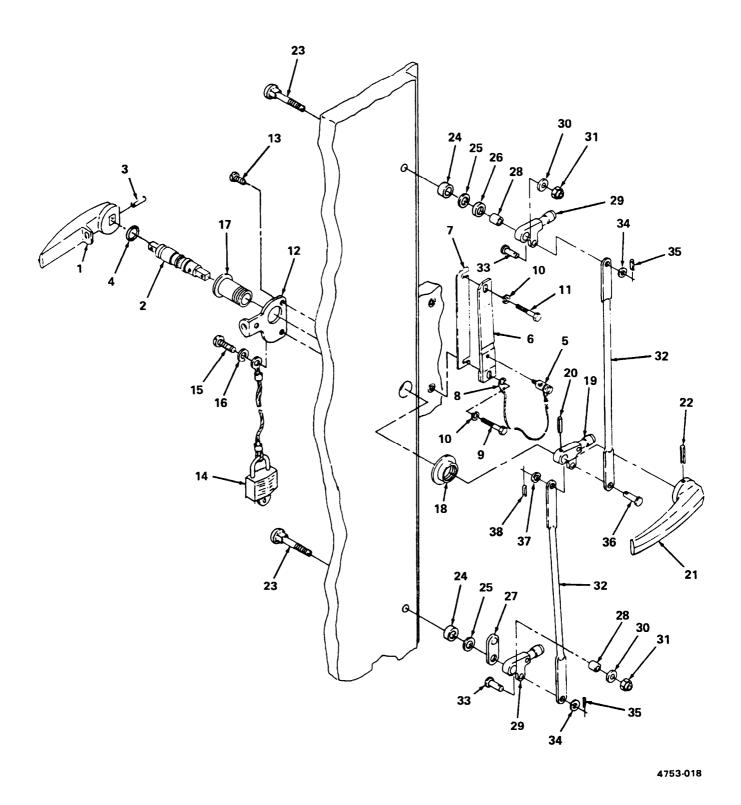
Door Latch Assembly Reassembly and Installation.
